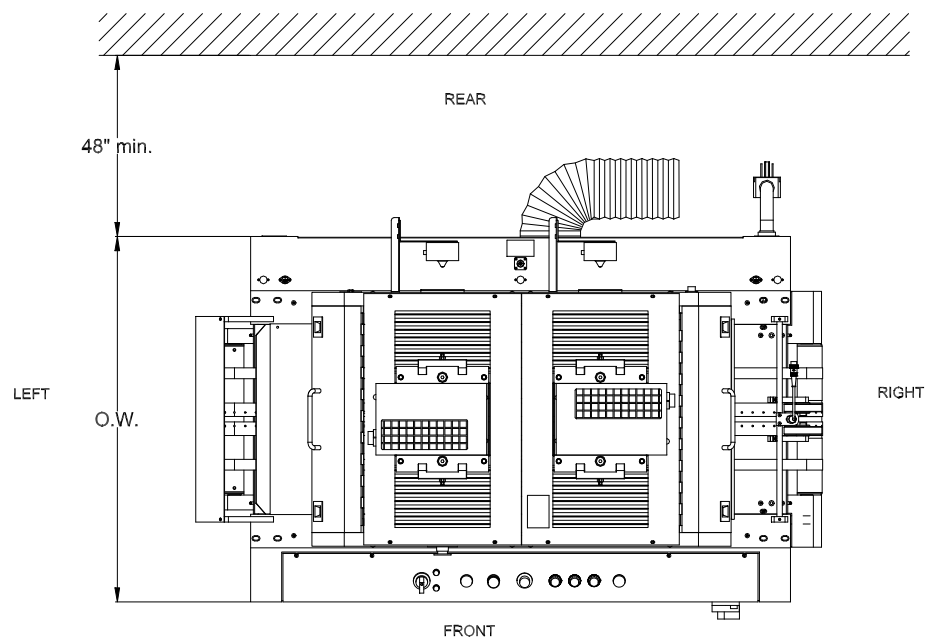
BK750 UV Curing Base Dimensions - Front View.
